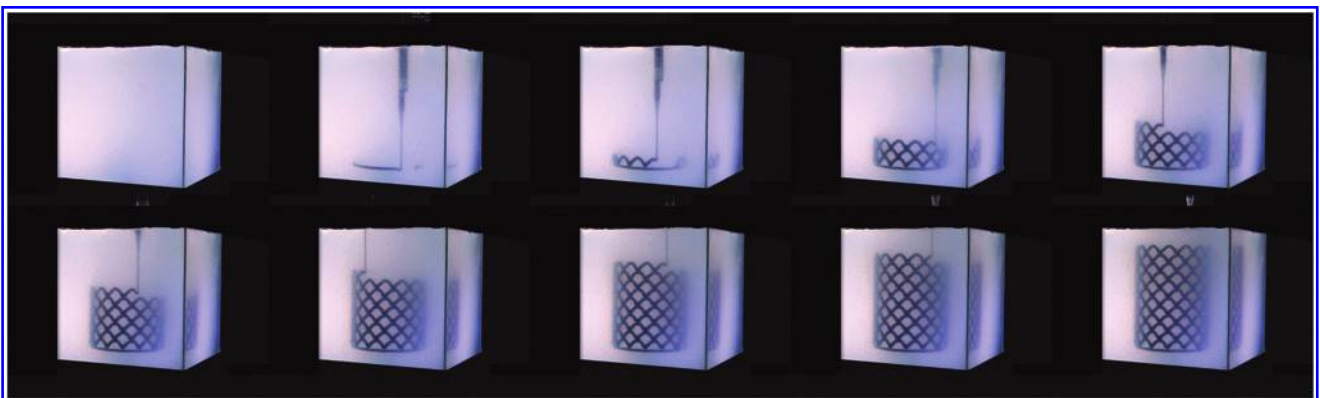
An RLP machine prints a 6" × 6" × 8" cylinder using urethane rubber with a maximum speed of 50 mm/s in 4 min and 49 s.
